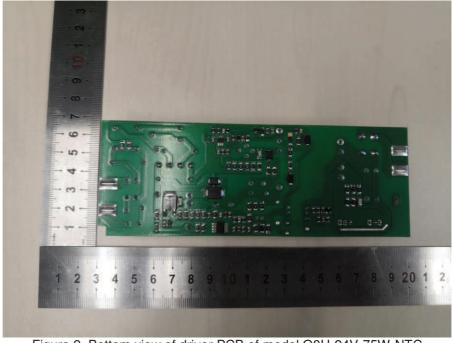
Bottom view of driver PCB of model Q8H-24V-75W-NTC
